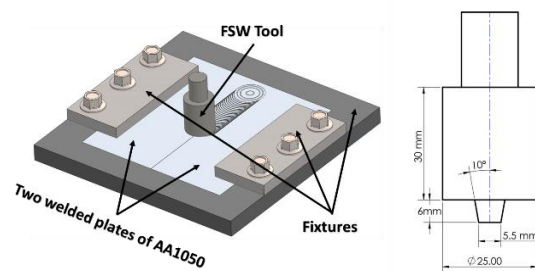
Schematic drawing of the FSW process and the FSW tool design
